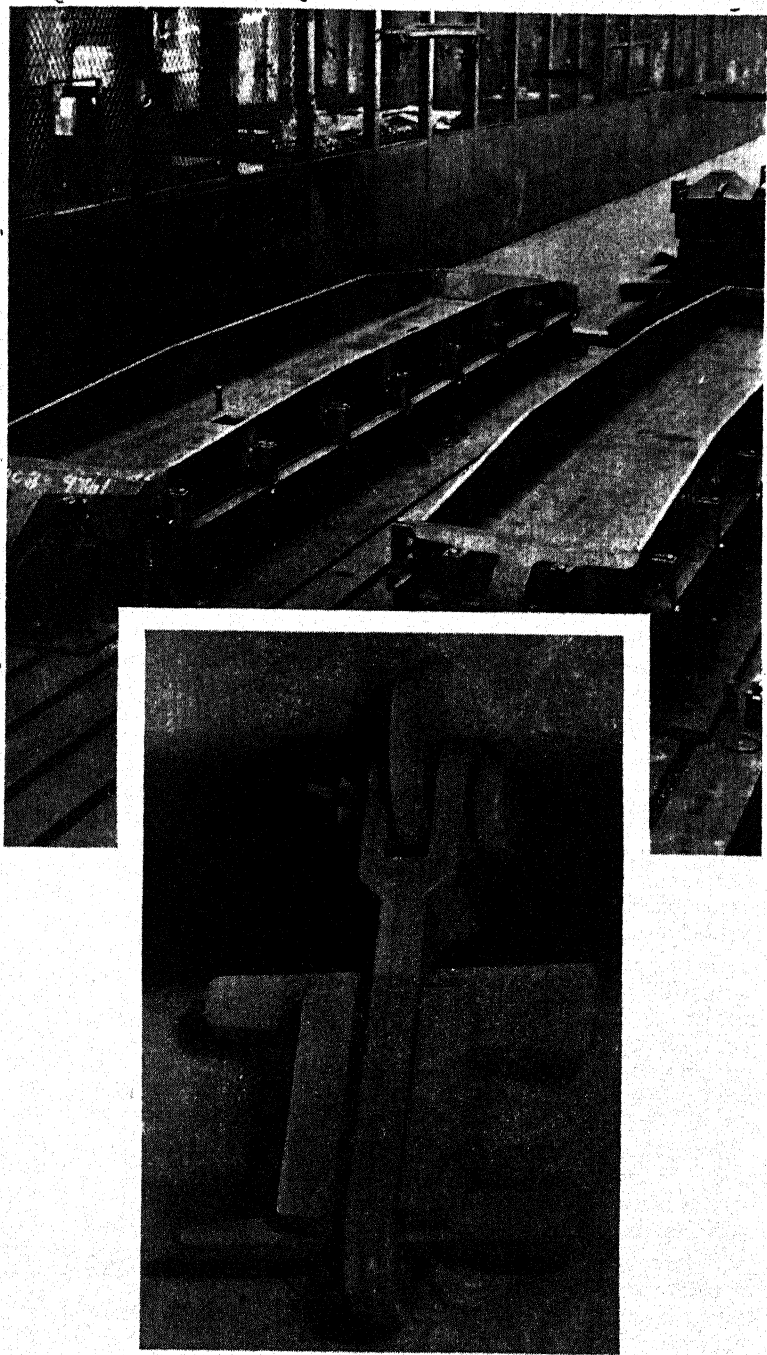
Fixtures are indispensable. These two align 43 separate pieces. Note spring steel snap ring to hold lugs.
